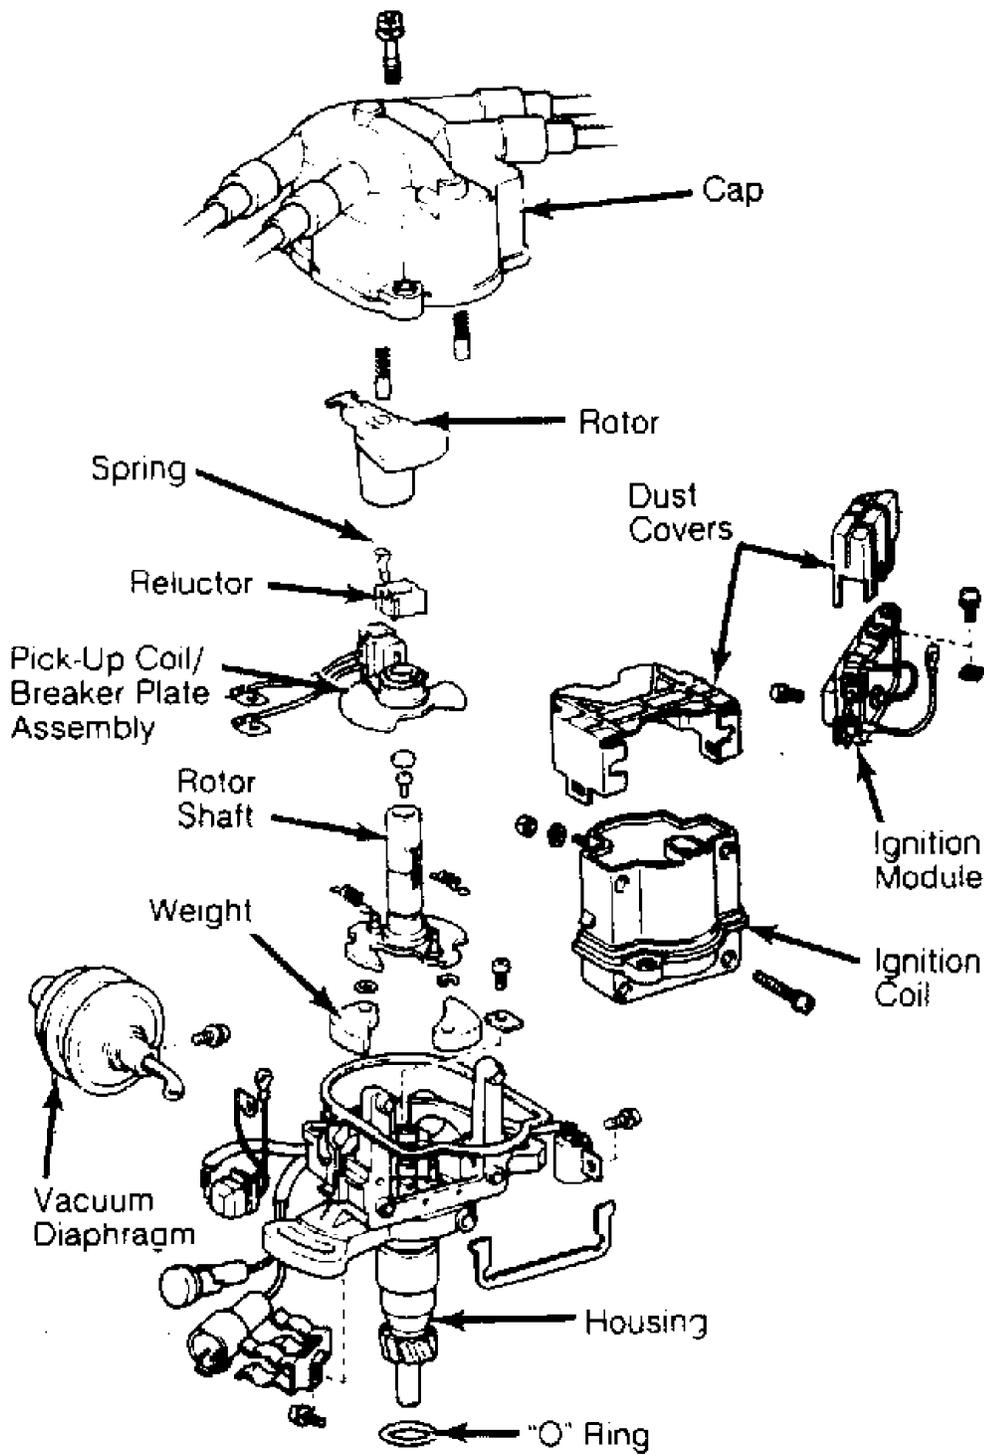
Exploded View of Typical Integrated Ignition Distributor
